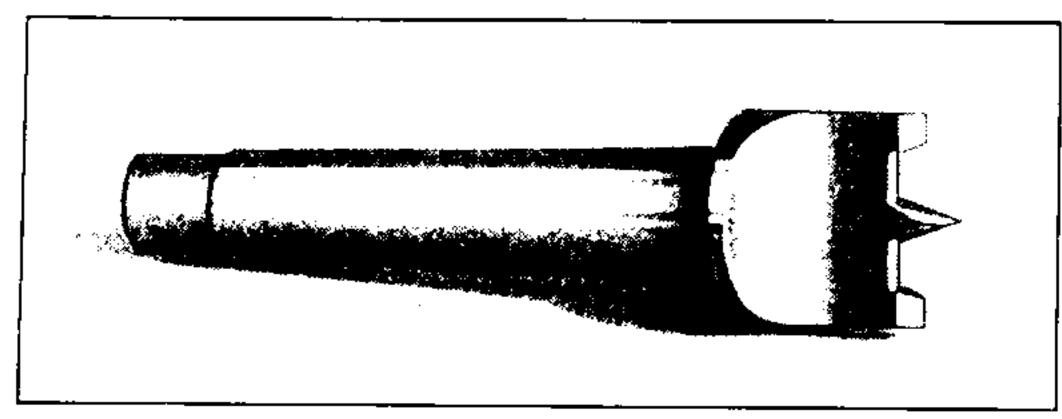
Spur Center — has conical center point and two knife edges. Useful for wood turning
